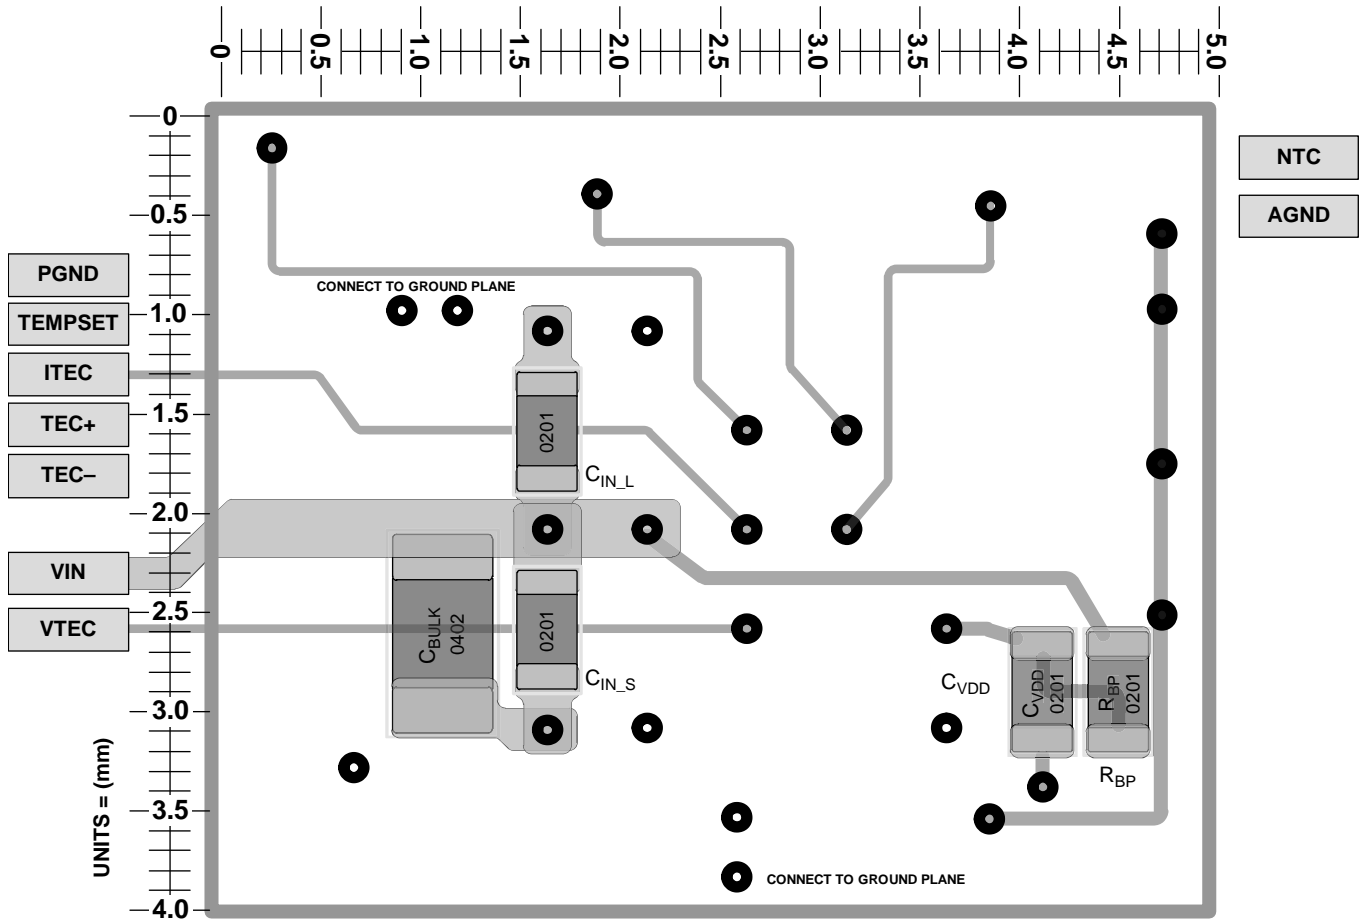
Example PCB Layout Using Two Layers (Bottom Layer Only)
